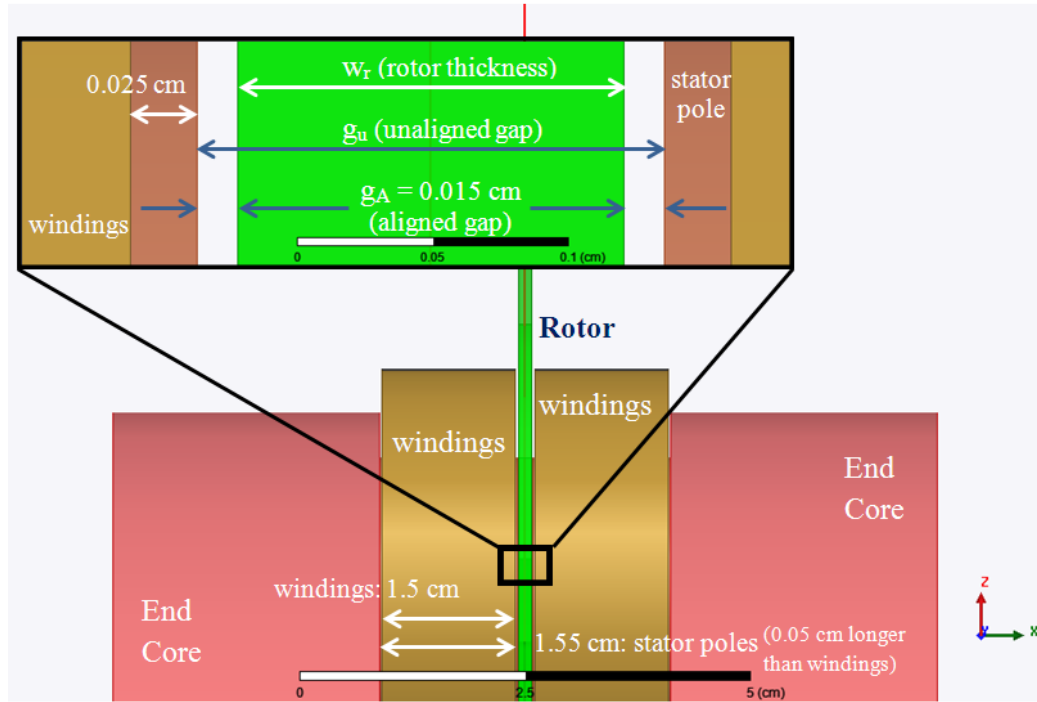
Dimensions for gaps and axial lengths, close-up side view
